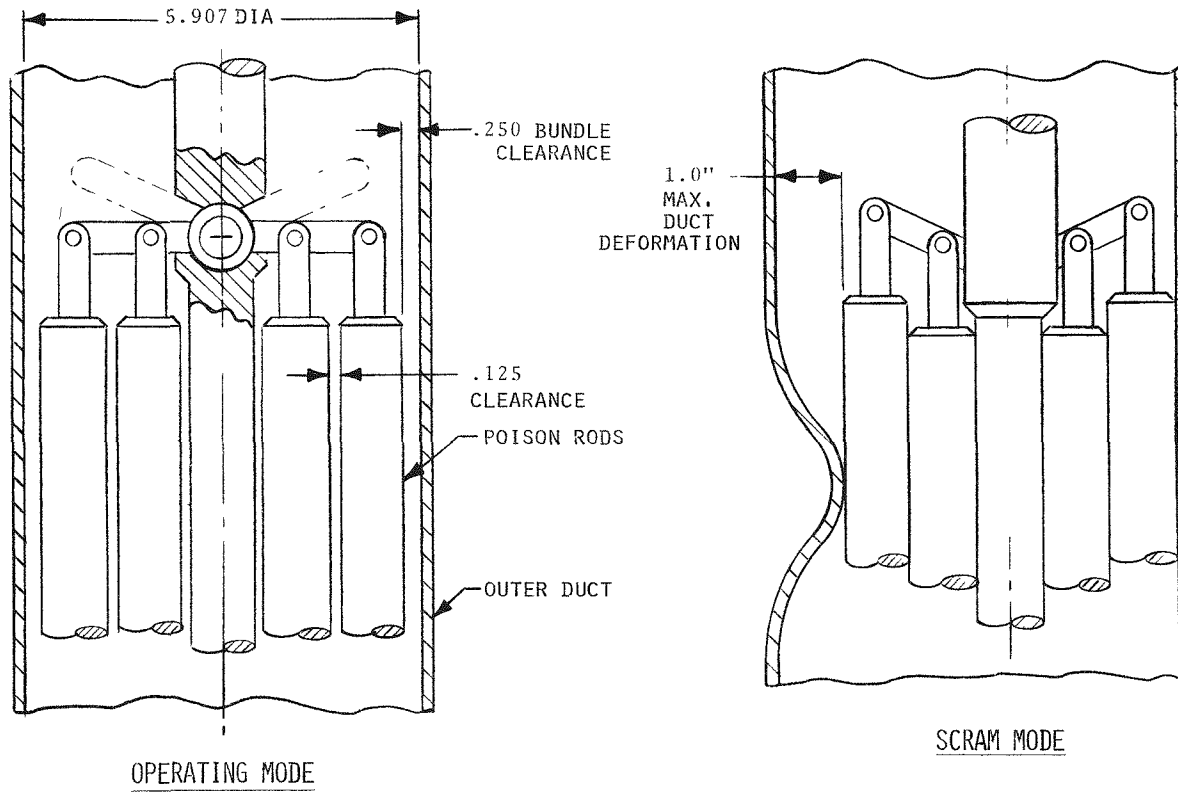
HINGED POISON SUPPORT CONCEPT ELEVATION
